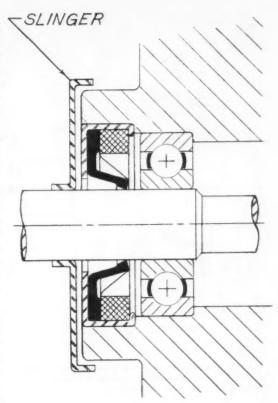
Slinger, mounted on shaft, improves the efficiency of unit type, synthetic rubber seal on this single-row, radial ball bearing
